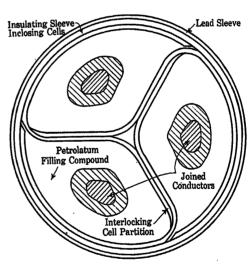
Construction and Dimensions—Conduct Joint Three-conductor 300,000-cir. mils, sector conductor 25,000-volt cable
